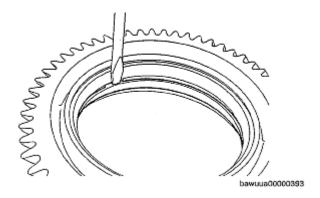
Removing Bearing Race Inner From Counter Drive Gear Courtesy of MAZDA MOTORS CORP.
